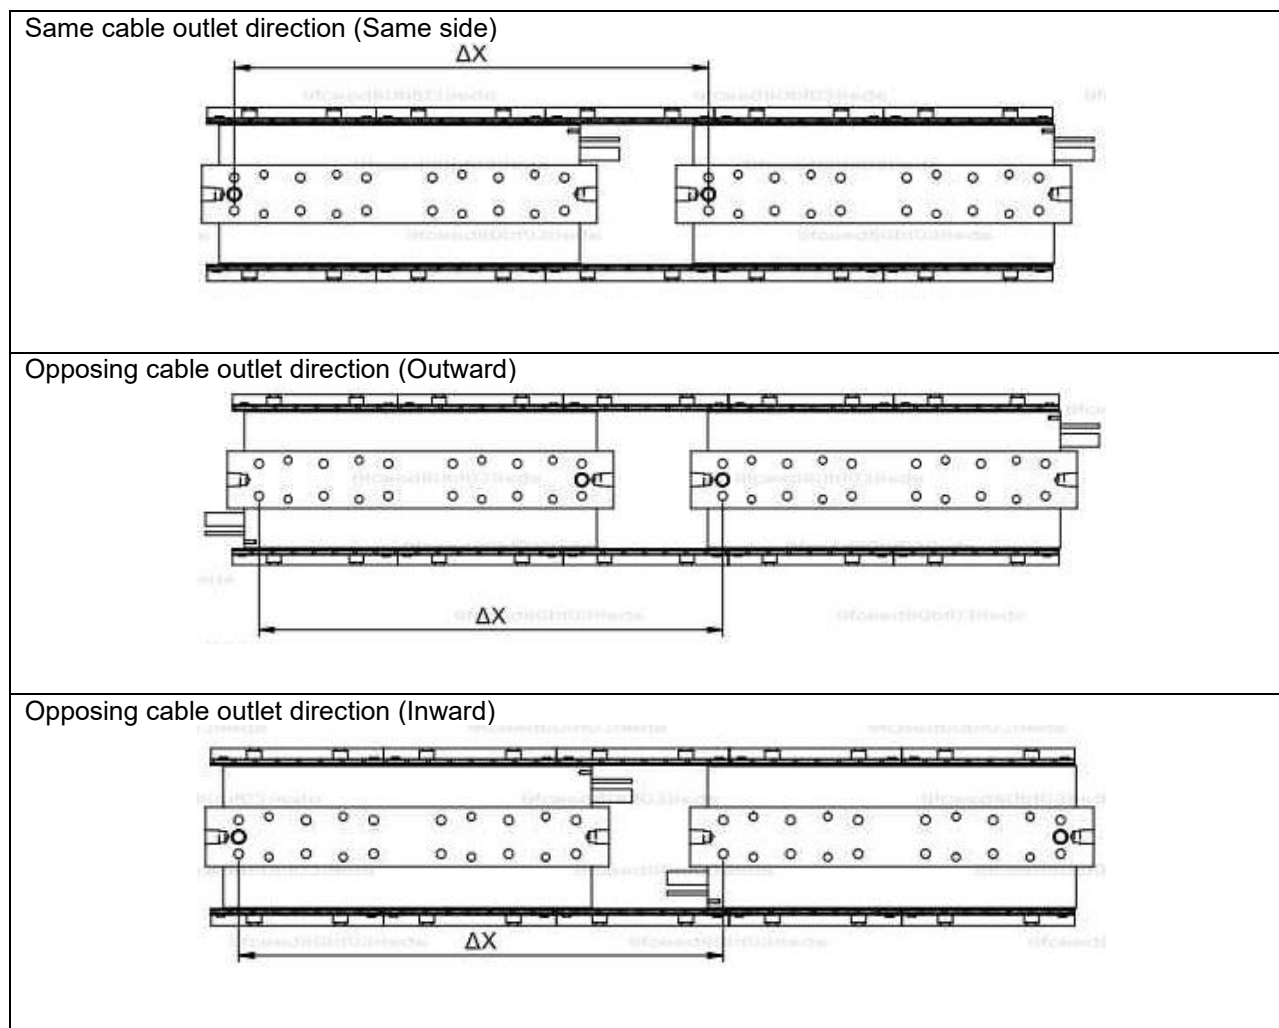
LMSC linear motor parallel connection illustration
